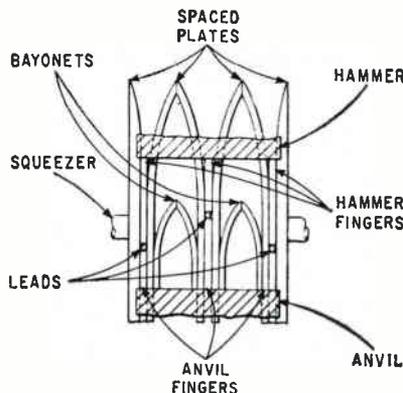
End view of squeeze position. Plates are shaped to comb leads as they enter
